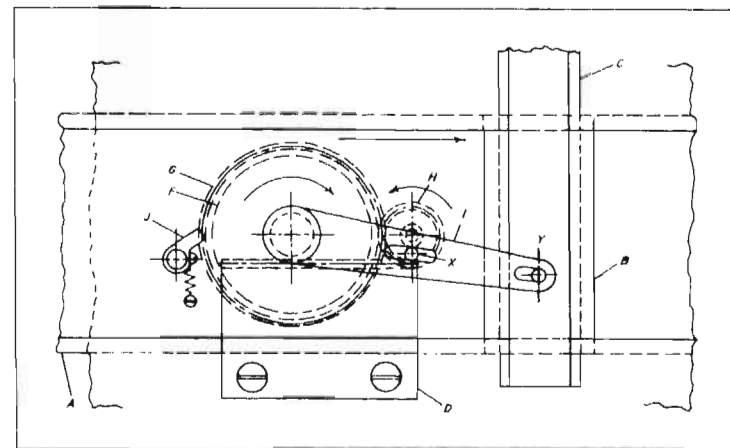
Mechanism for wire fabricating machine when one-quarter of slide movement has been completed.
